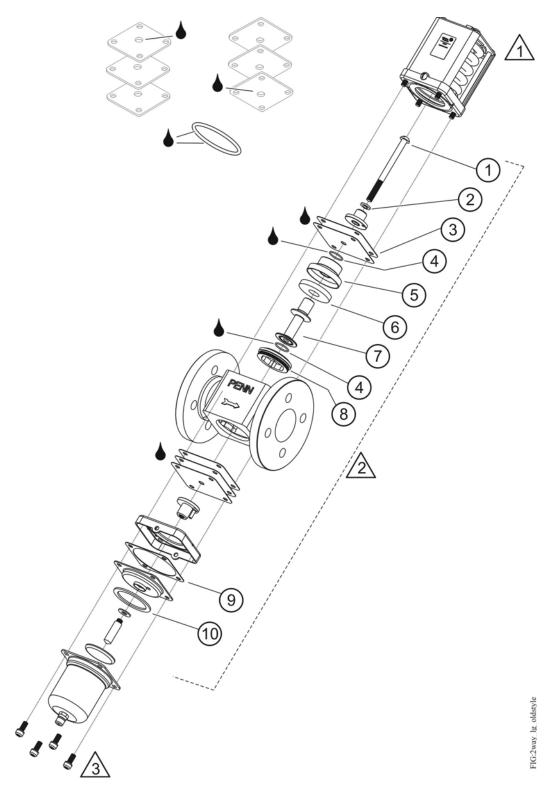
V46 and V47 Valves, 2 in. and 2-1/2 in. Size, Exploded View
